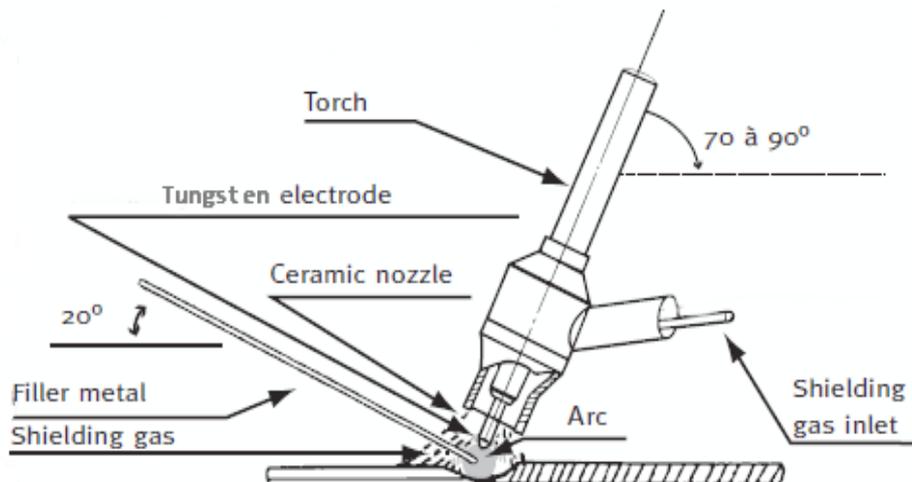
The principle of arc welding with a tungsten electrode in a gas shield.
